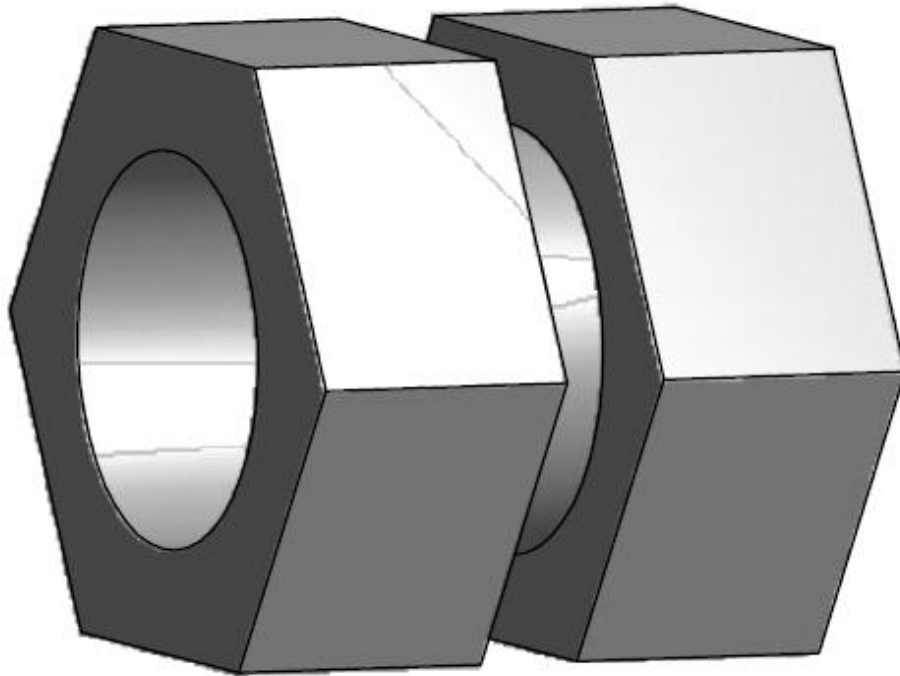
Torsional Kolsky Bar Test Specimen [5]
